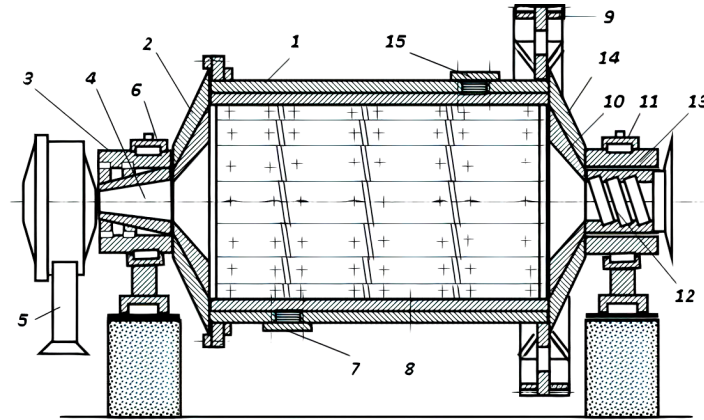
Ball mill with central unloading: 1 – cylindrical drum; 2, 14 – end caps; 3, 13 – hollow pins; 4 – loading funnel; 5 – feeder; 6, 11 – bearing; 7, 15 – hatches; 8, 10 – lining plates; 9 – crown gear; 12 – unloading funnel
